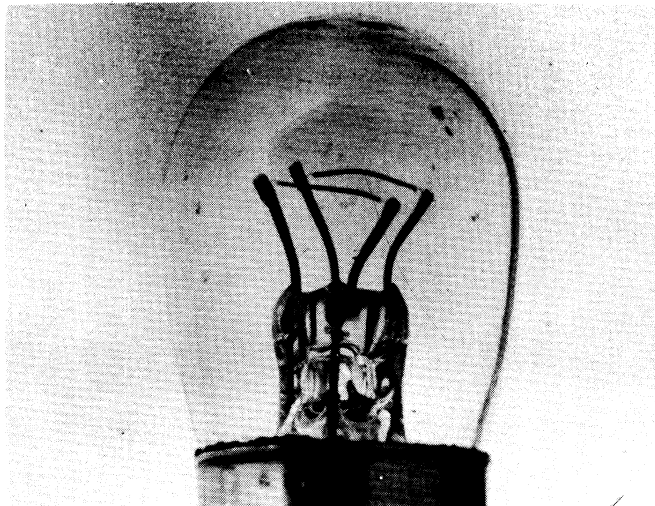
A lamp with four-wire, flange-stem construction mounted in a B-6 bulb with unsupported 1251 filaments.
